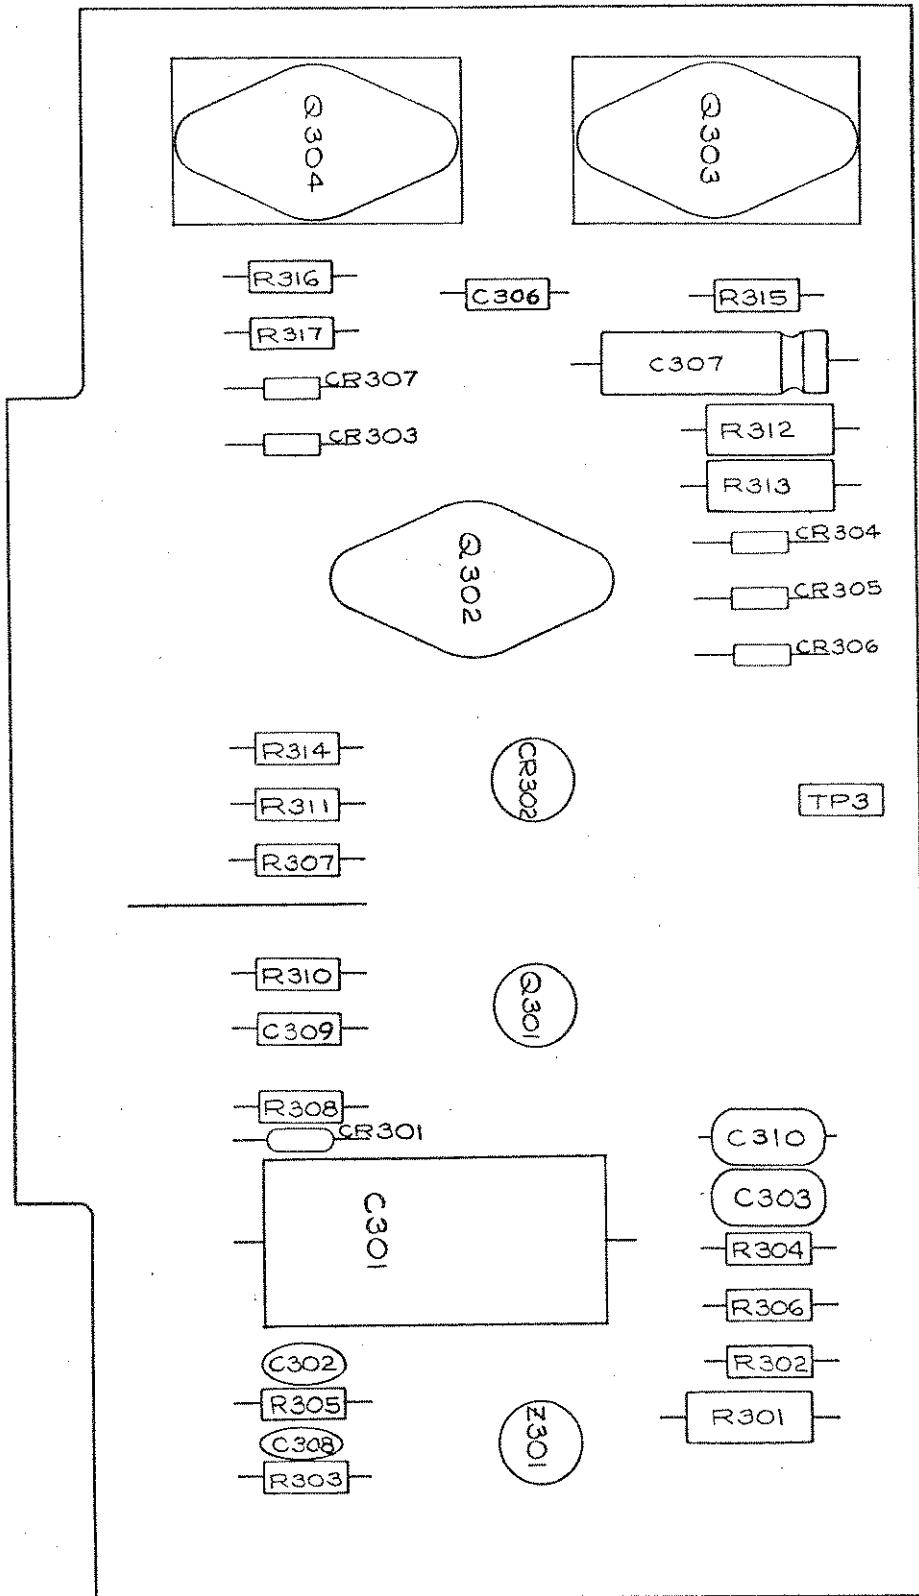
AMPLIFIER BOARD ASSEMBLY, MODELS 6006B, 6005B, 6106B, 6015B
